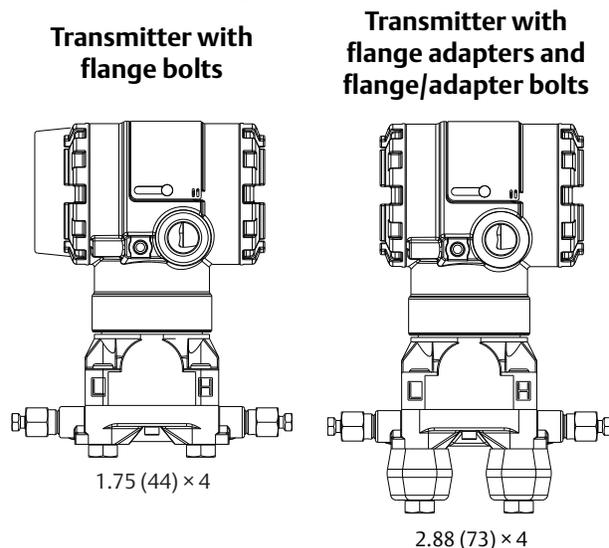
Mounting Bolts and Bolt Configurations for Coplanar Flange
